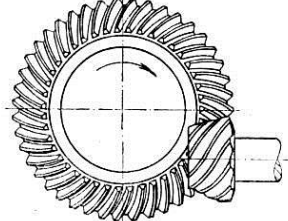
Bevel gears are used to transmit rotary motion between intersecting shafts.
